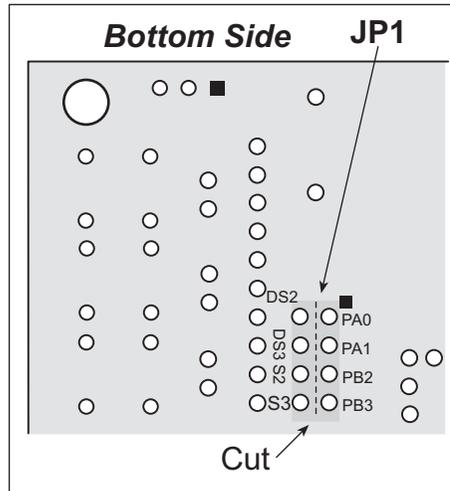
Where to Cut Traces to Permanently Disable Demonstration Hardware on Prototyping Board
